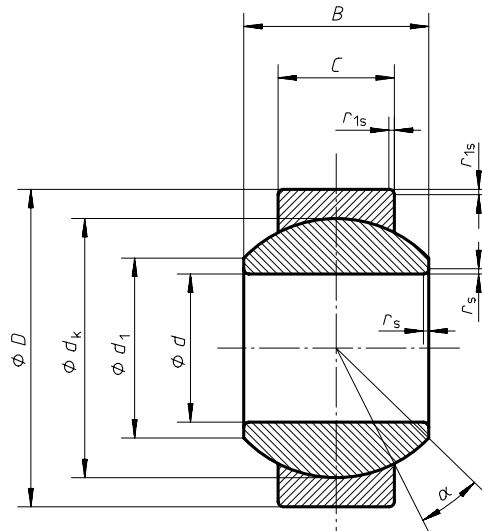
Radial spherical plain bearings, dimension series E, G, C, K, H
